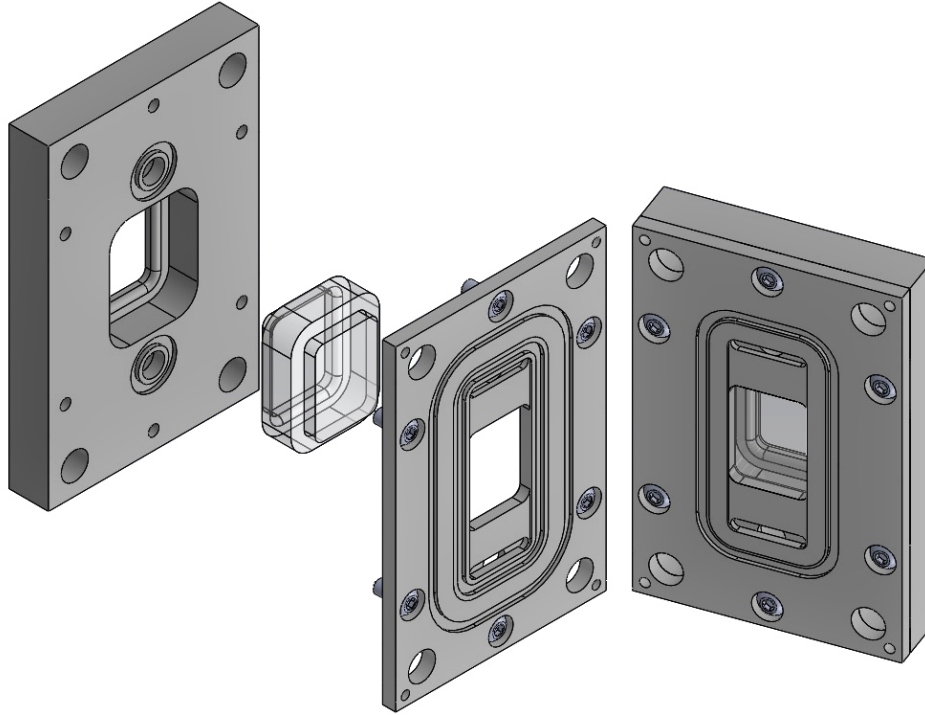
CAD rendering of the high pressure fouling visualization module with the feed side disassembled.
